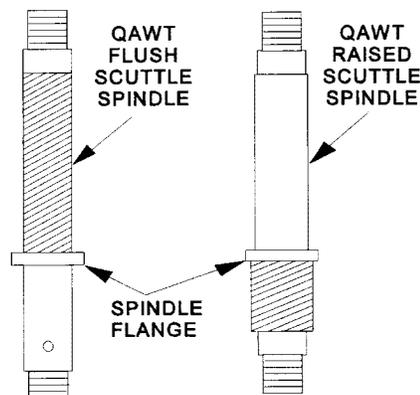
Quick-Acting Watertight Scuttle Spindles
